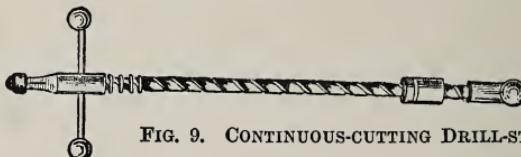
CONTINUOUS-CUTTING DRILL-STOCK.
